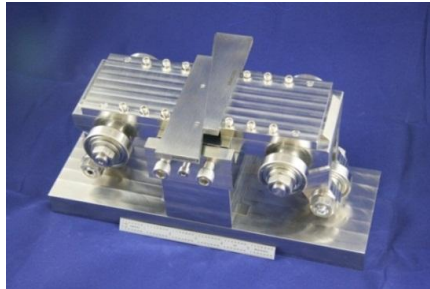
Carts in the alignment fixture with adjustable parallels setting the gage length
